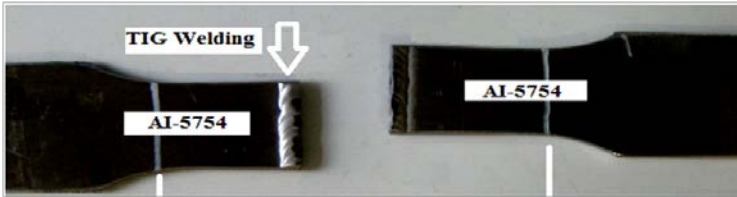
Tensile test fracture surfaces Al 5754 GTAW weld material
